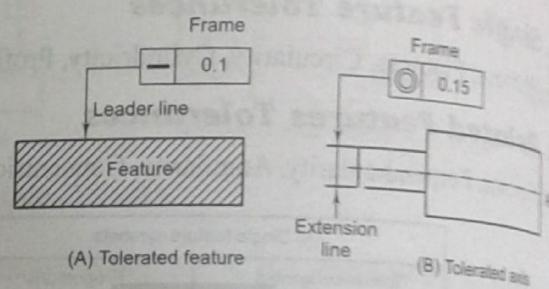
Indicating Tolerances on a Drawing
